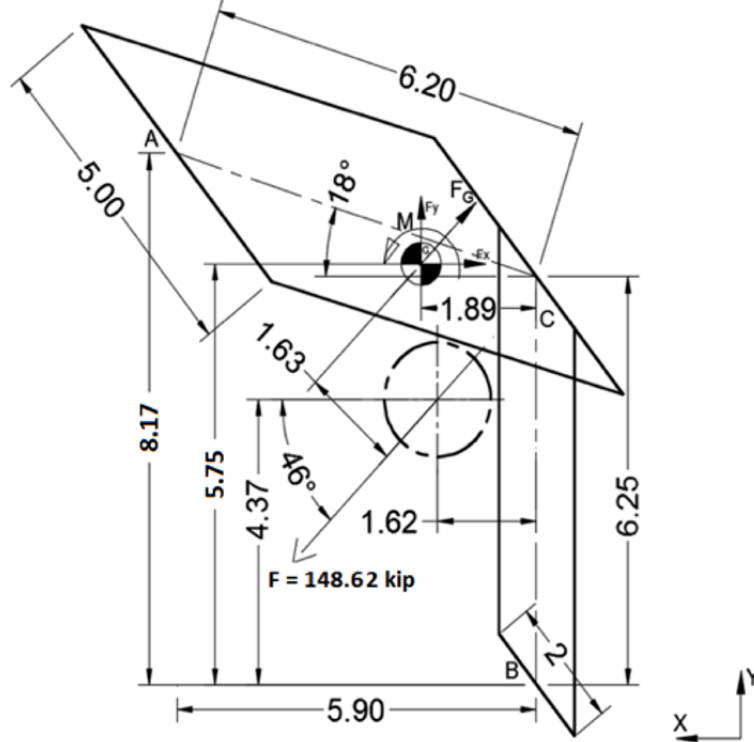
Weld Geometry of Tie-Down Rib and Gusset to Overpack
